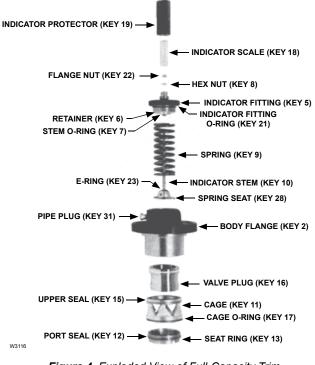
Exploded View of Full-Capacity Trim Package Assembly
